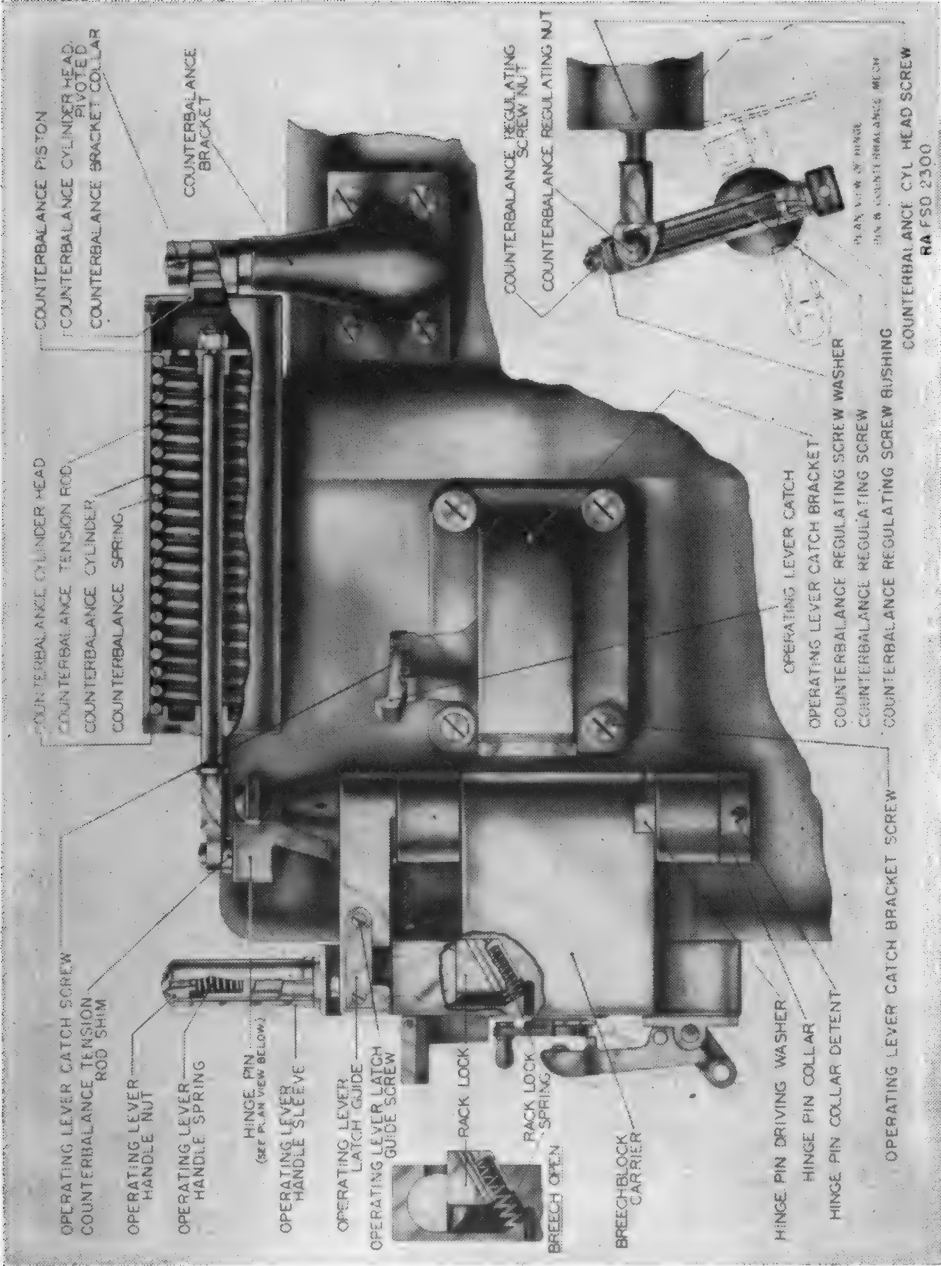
Breech mechanism and counterbalance cylinder—assembled and sectioned views.
